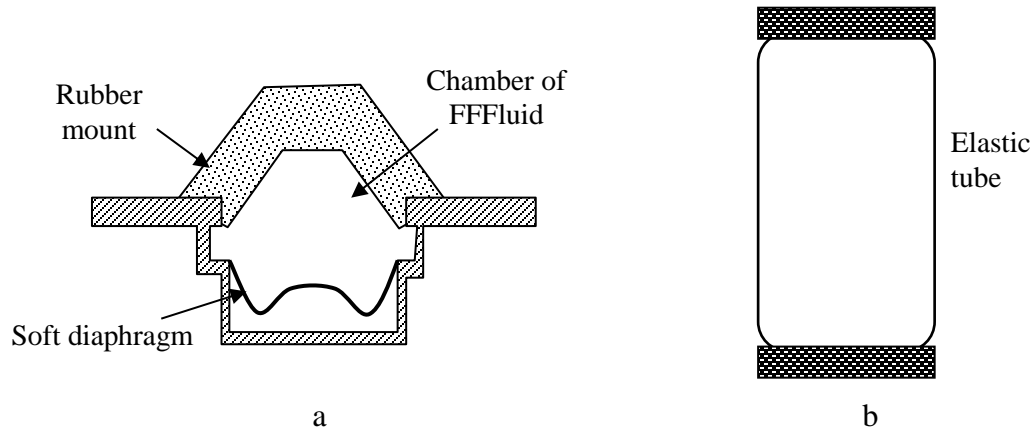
Proposed package of FFFluid devices: a) Elastomer mount, b) elastic tube.
